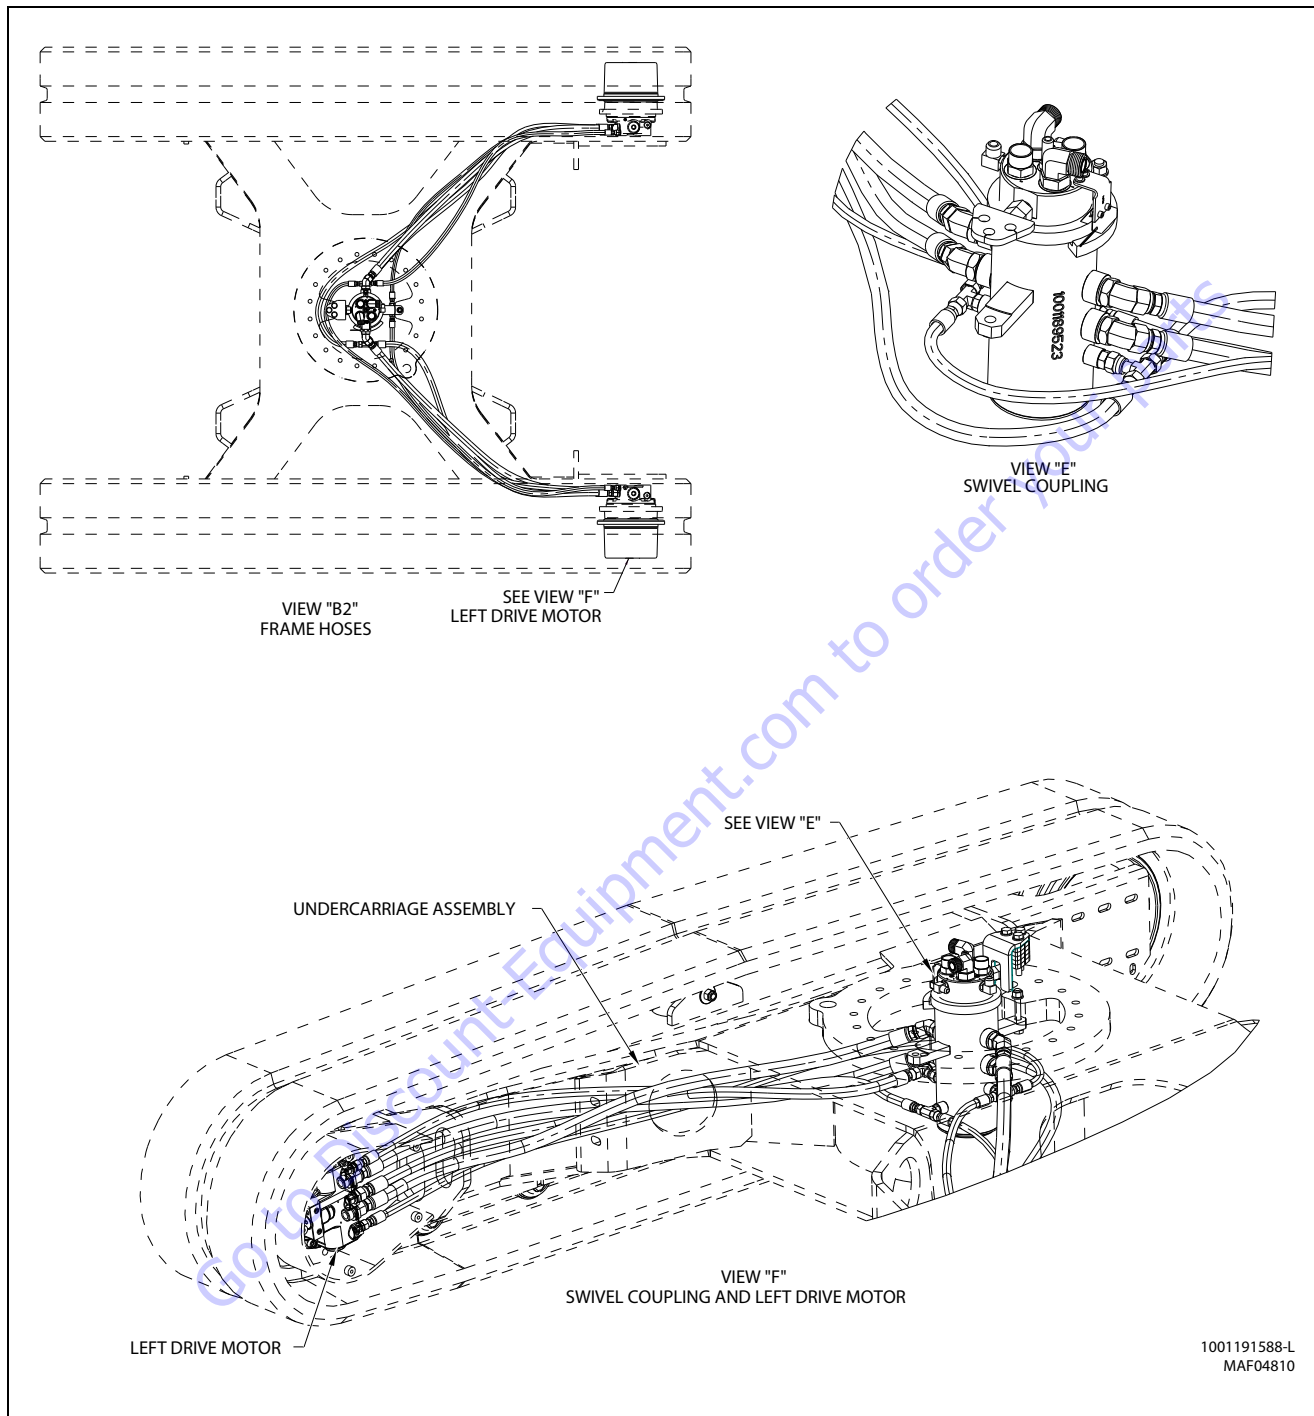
Hydraulic System Installation (400SC) - Sheet 7 of 16
